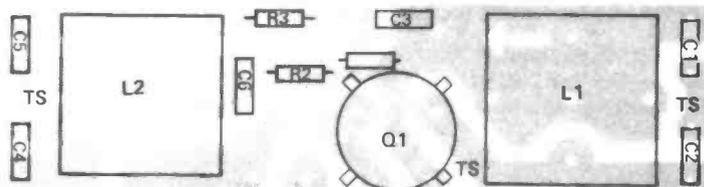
Component layout. The places worked (TS) must also be top soldered.
